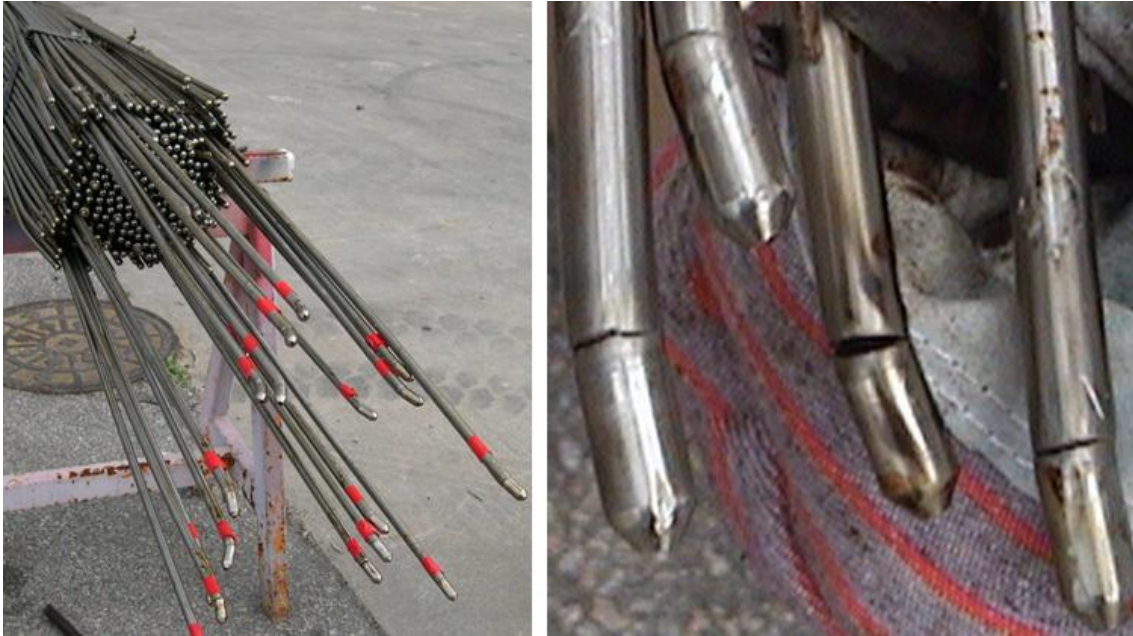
Examples of failed welds from drop tests of fuel assembly shipping packages.
